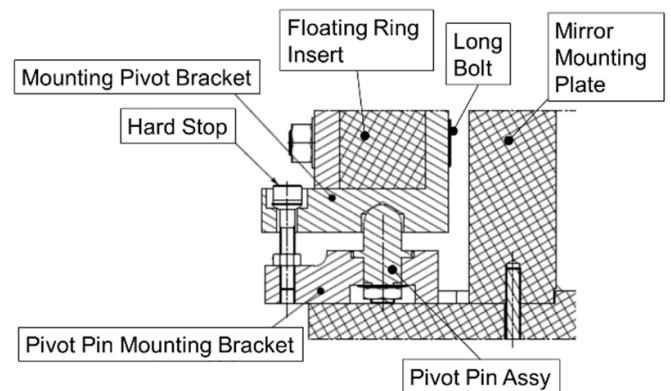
Cross section of the side view showing the Hard Stop between the 'Mounting Pivot Bracket' and the 'Pivot Pin—Mounting Bracket'.
